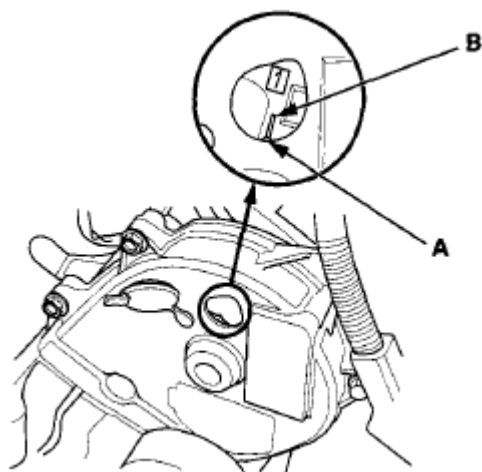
Aligning Pointer On Front Upper Cover With No. 1 Piston TDC Mark On Front Camshaft Pulley
